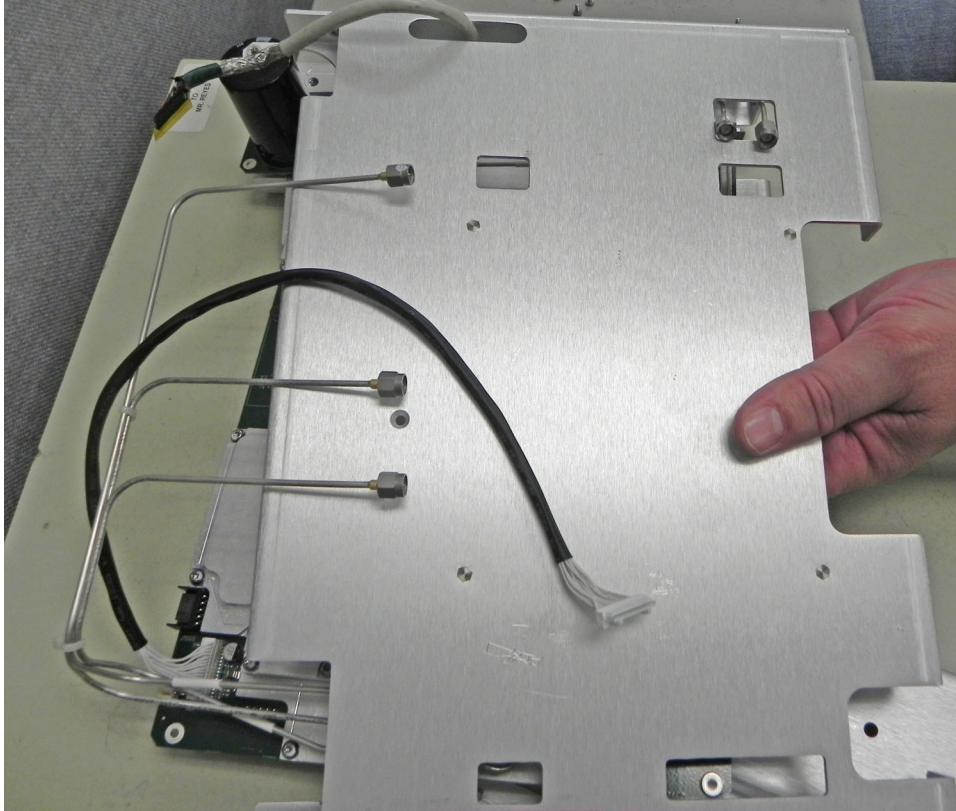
Sliding the RF Assembly Cover Plate Off the RF Assembly
